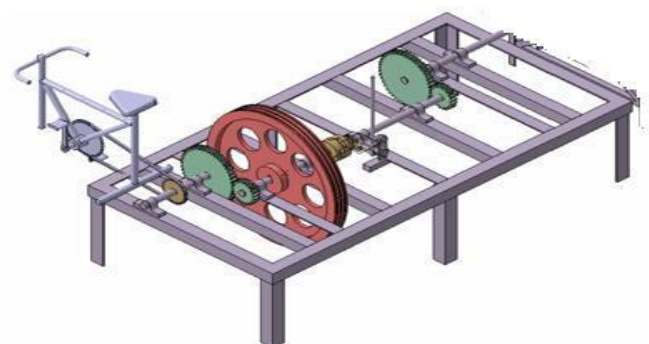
Bicycle mechanism with flywheel as energy unit with mechanical power transmission from input to the output by means of mechanical component like chains, shaft, gears, flywheel & coupling.
